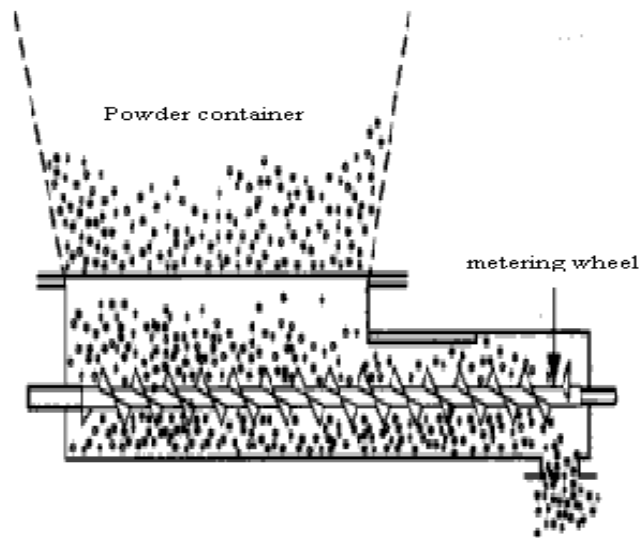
A schematic of mechanical wheel powder feeder [34]
